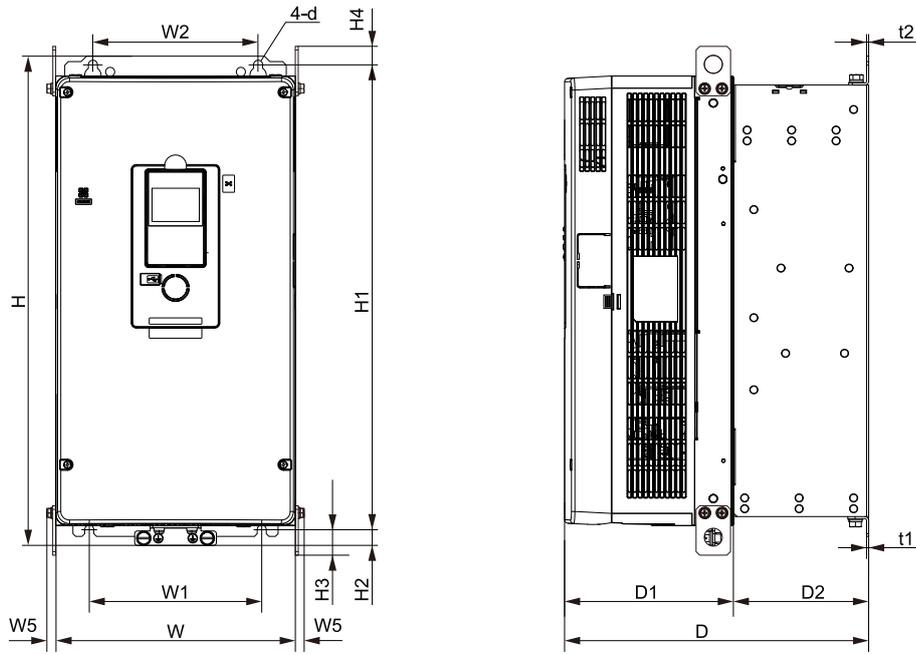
Exterior and Mounting Dimensions Diagram 6
